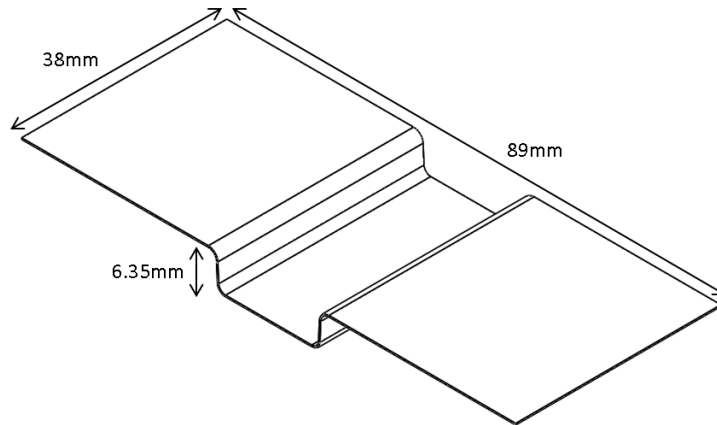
Test geometry of the U-shape part used for the comprehensive study.
